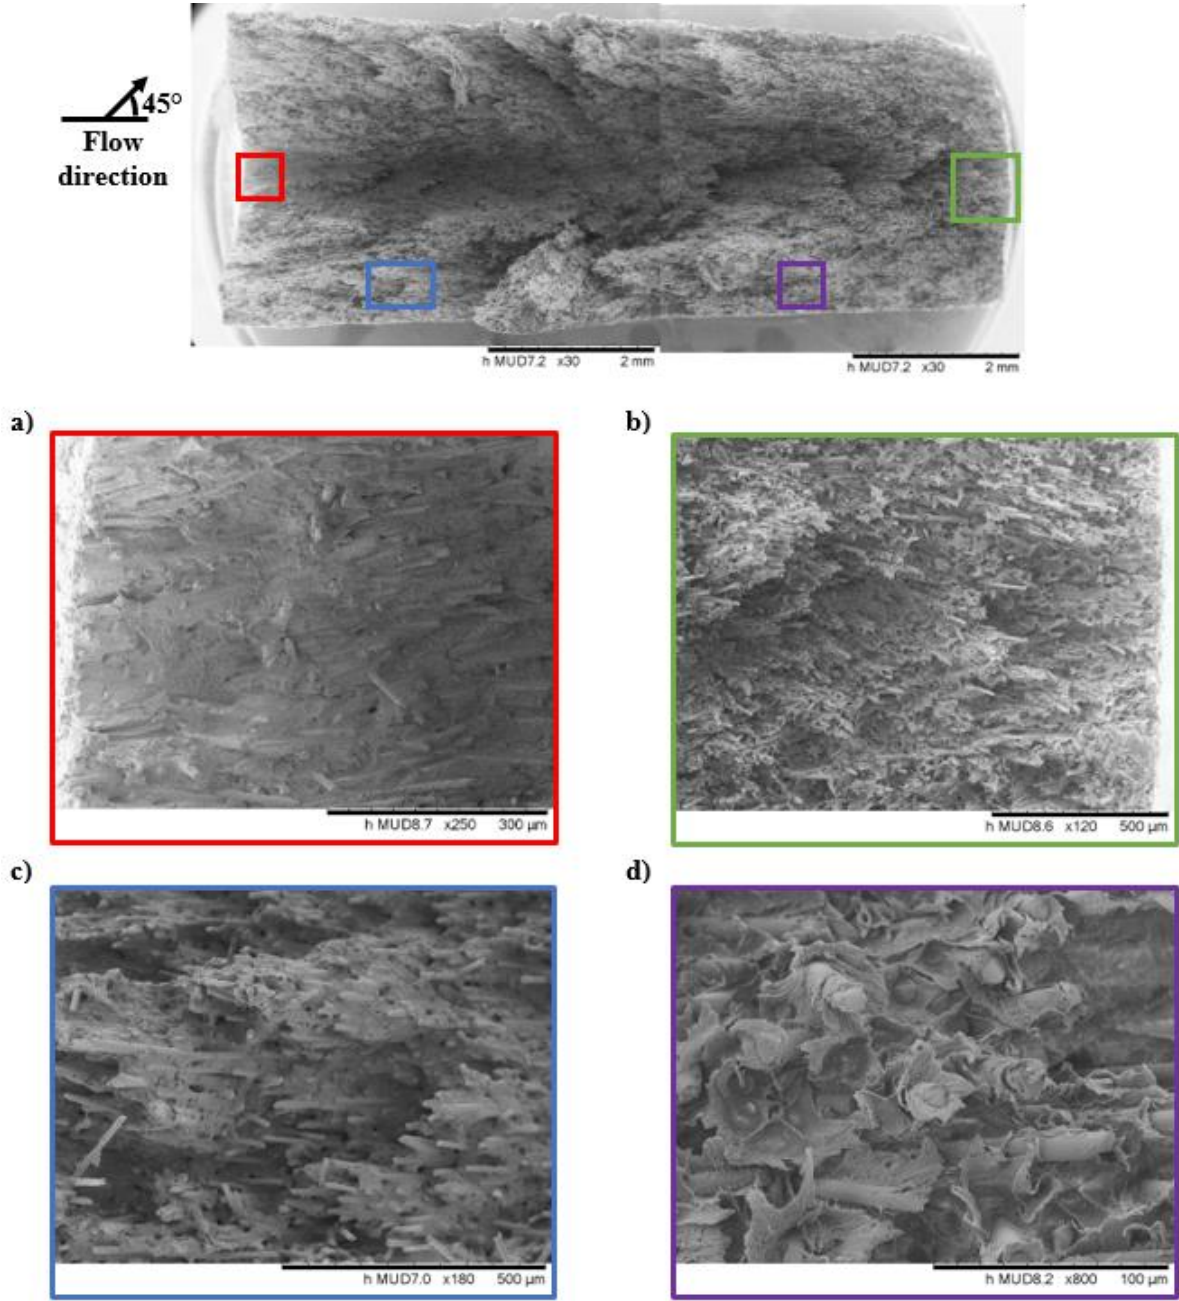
Fracture surface of a tensile 45° specimen at 50° C
